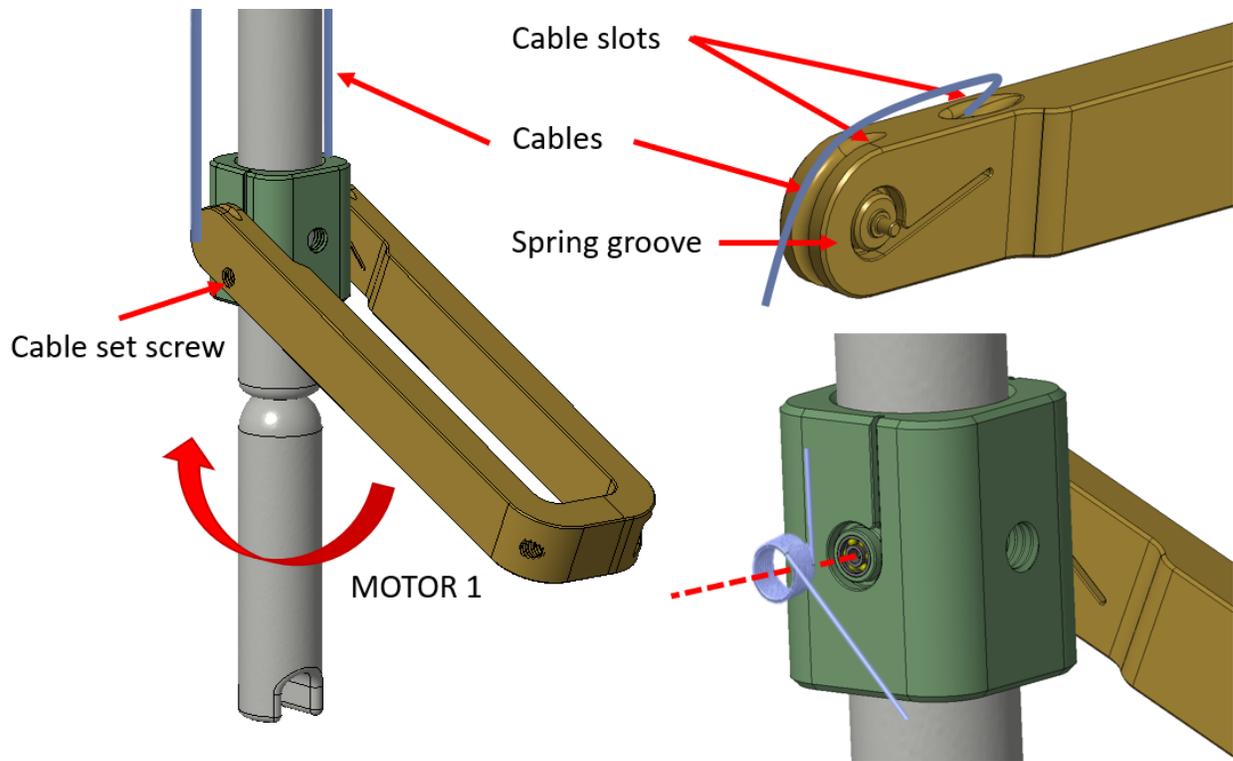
Swing mechanism of suture tensioning device showing the lever motion, cables, cable set screw, cable slots and spring grooves.
